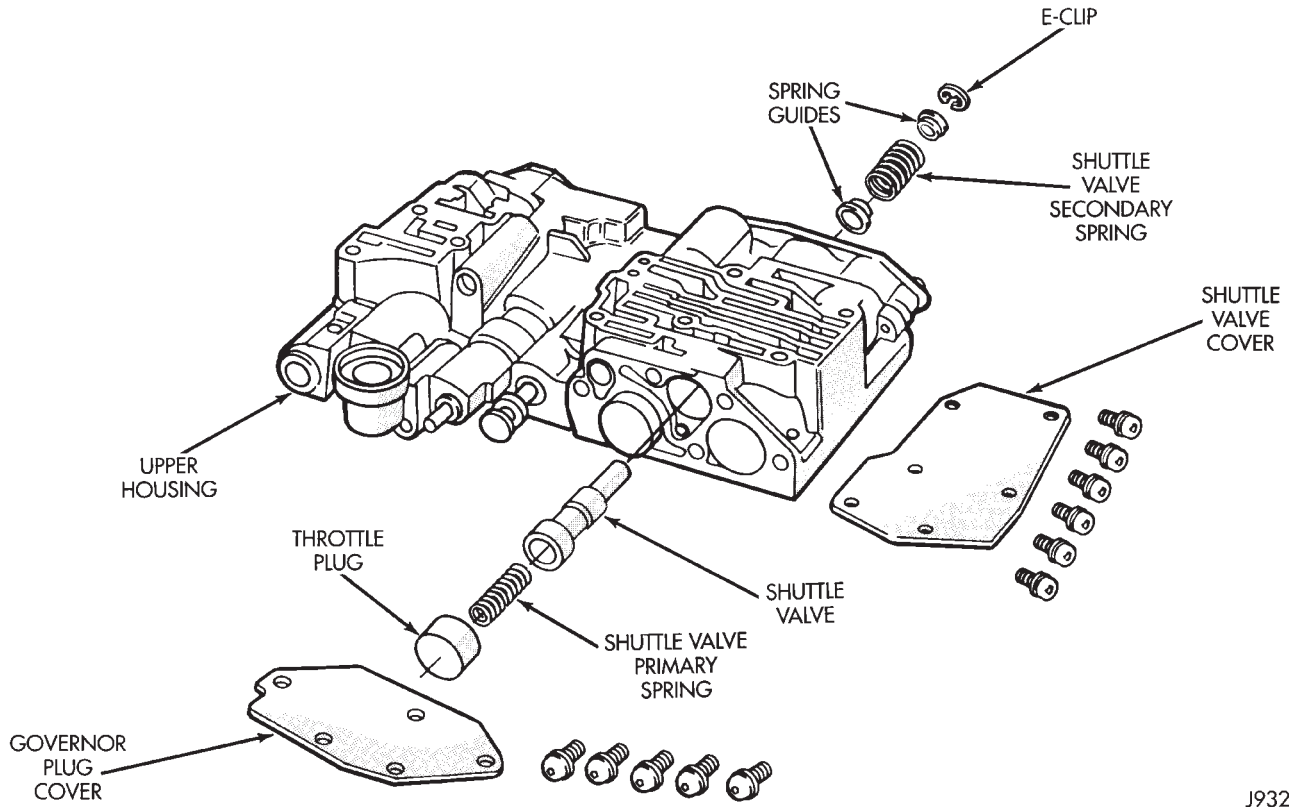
Shuttle Valve E-Clip And Secondary Spring Location (42RH)
